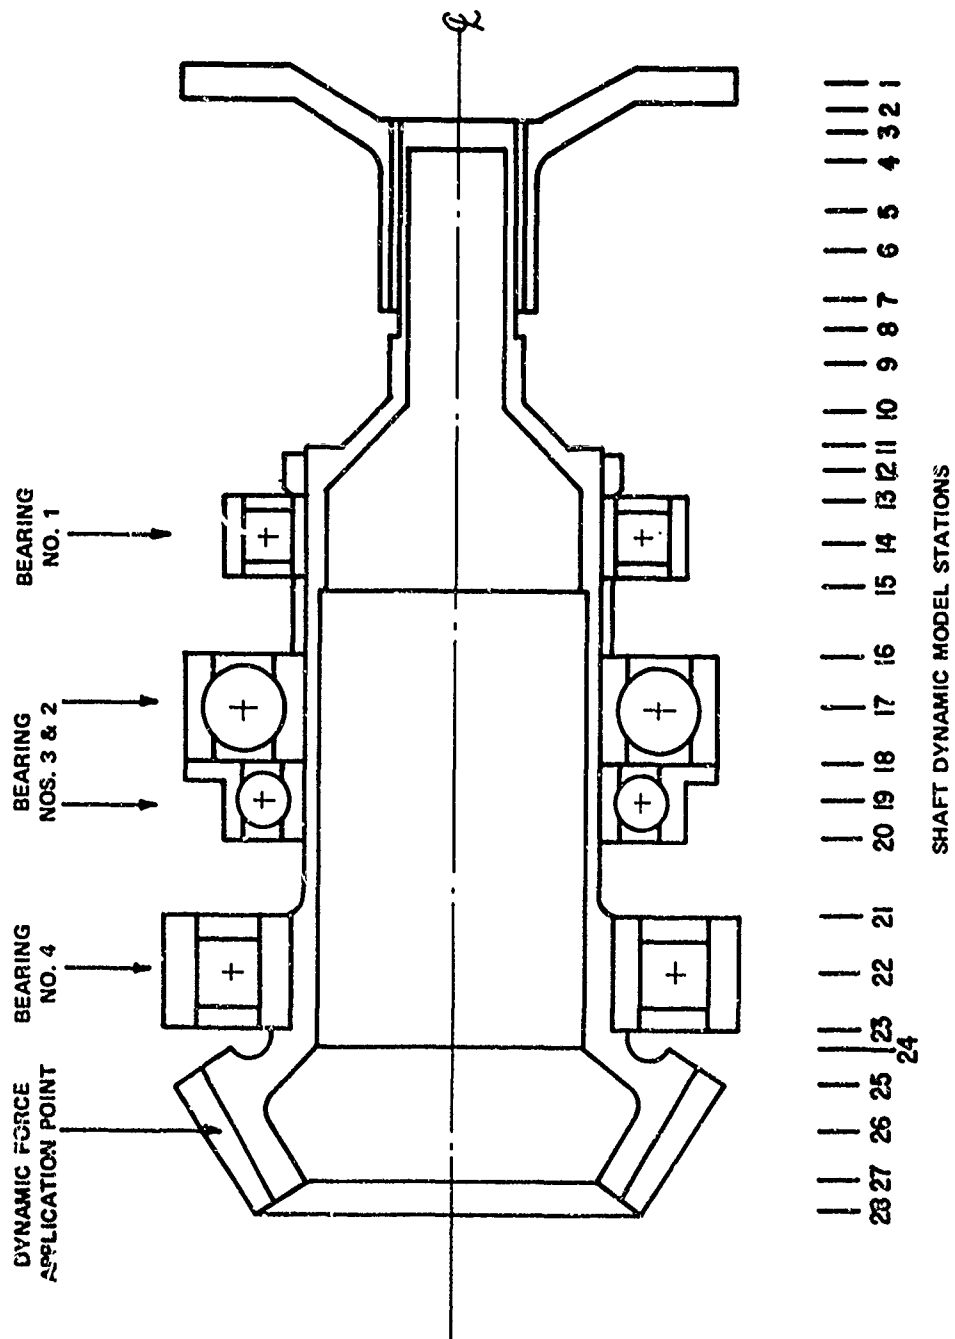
CH-47 Input Bevel Gear Shaft Dynamic Modeling Details.
